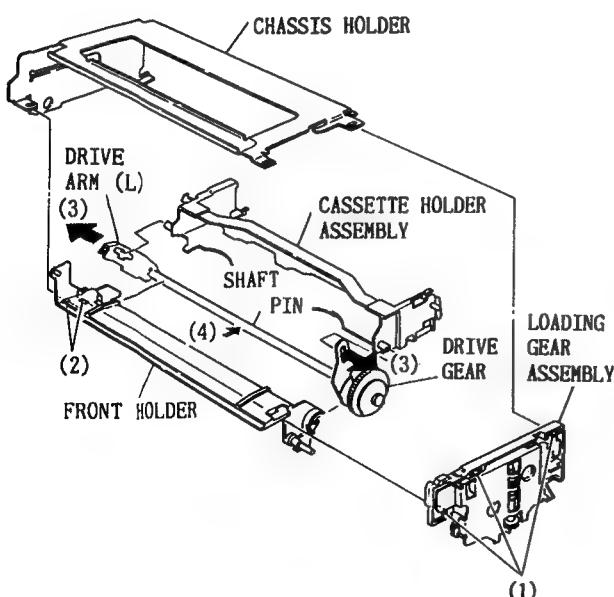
Loading Gear Assembly, Chassis Holder, Cassette Holder Assembly and Front Holder
